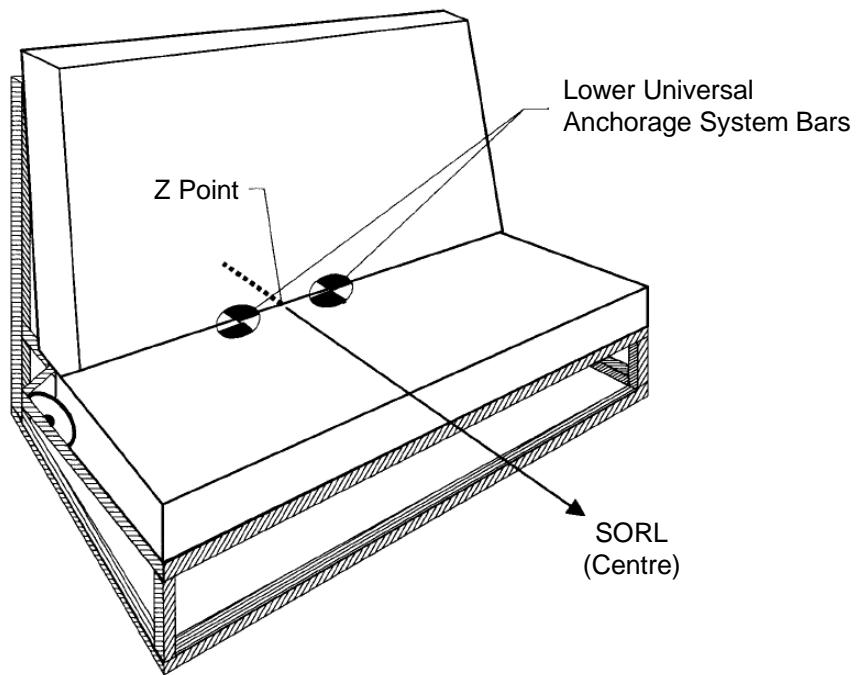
Three-dimensional Schematic View of the Standard Seat Assembly Indicating Location of the Seat Belt Anchorage Points
